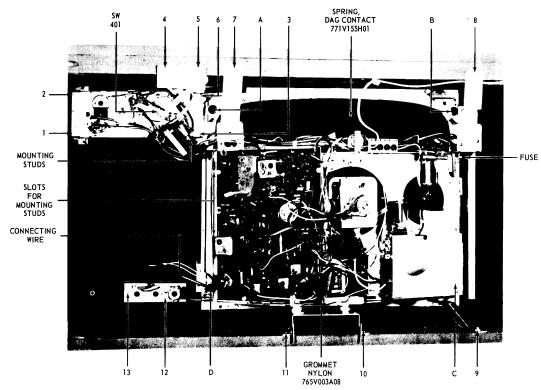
Rear view of V-2475-12 chassis, showing location of screws for chassis removal.
